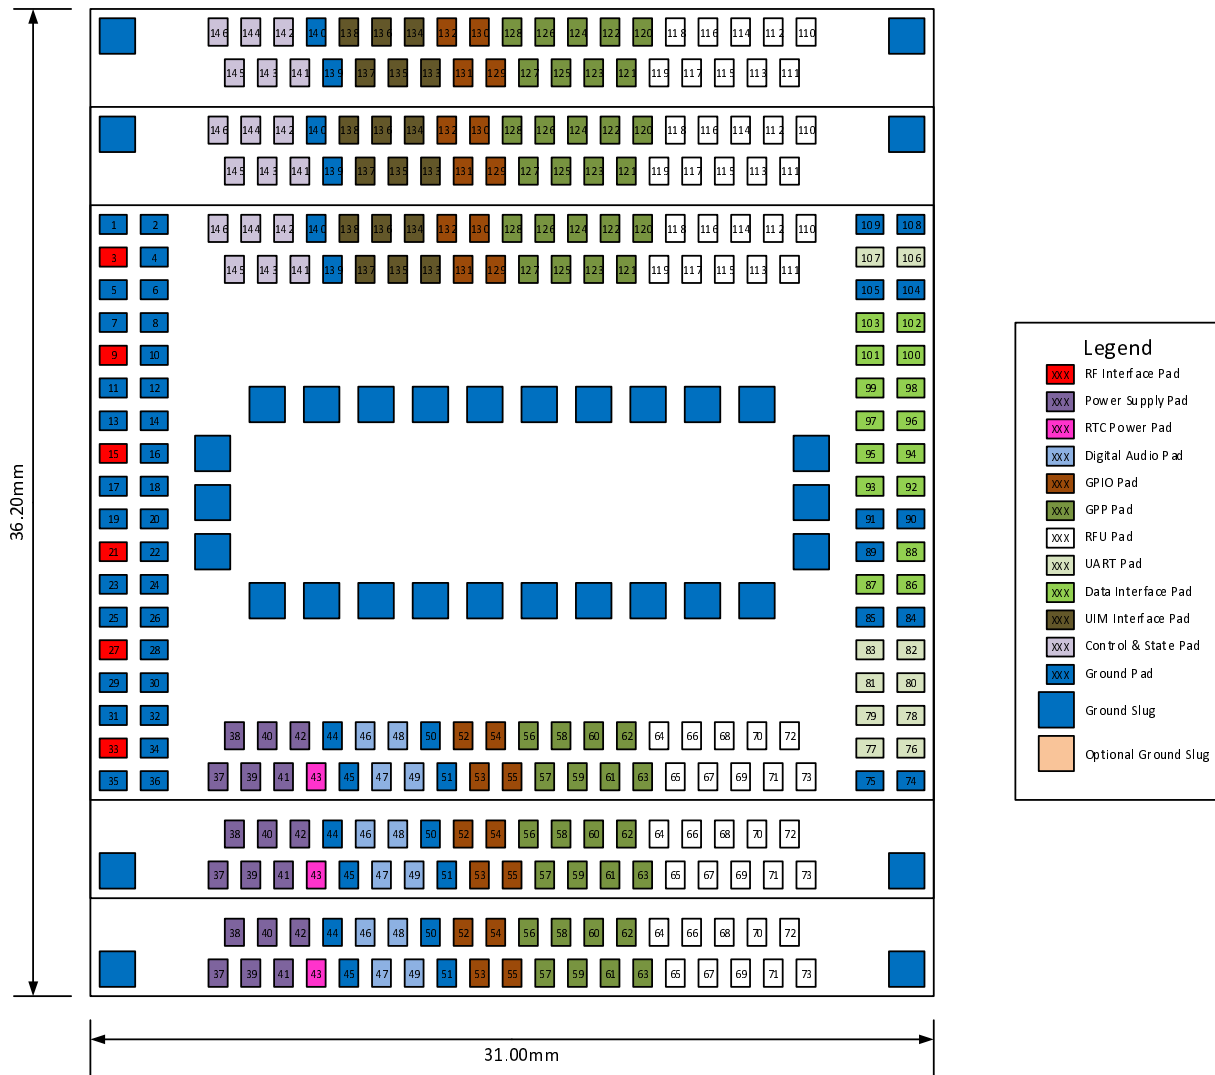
SMT3136, SMT3129 and SMT3122 Common PCB Pad Layout
